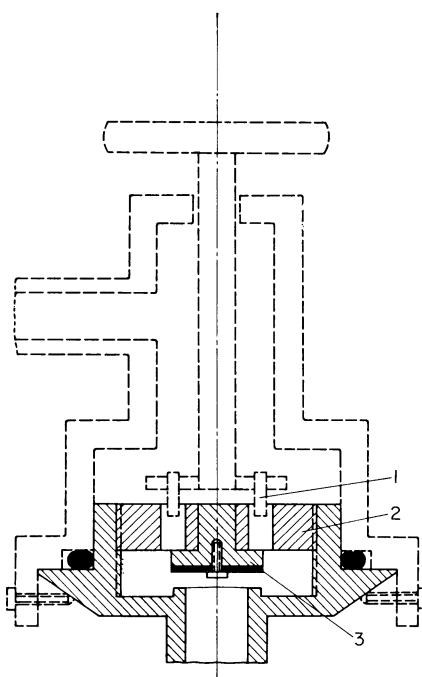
Seal-off valve. After Richards¹⁰⁵³ (*Courtesy of The American Institute of Physics*)
